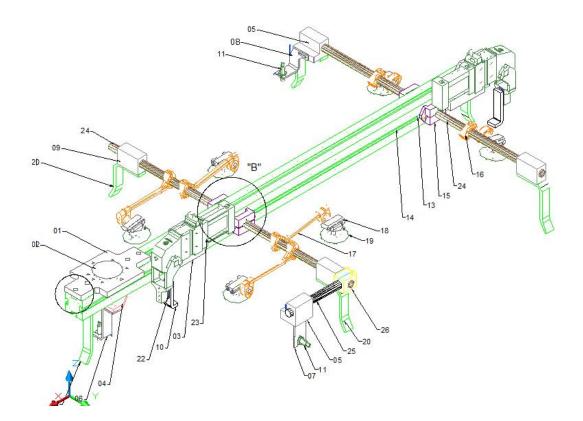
3 D Design of the grabbing device assembly while handling the metallic structure isometric view 2
